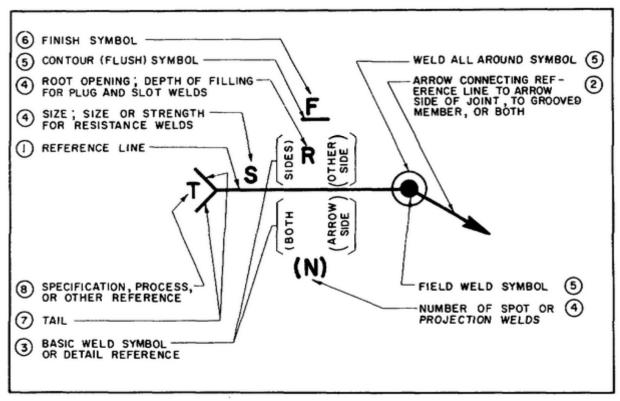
Standard location of elements of a welding symbol.
